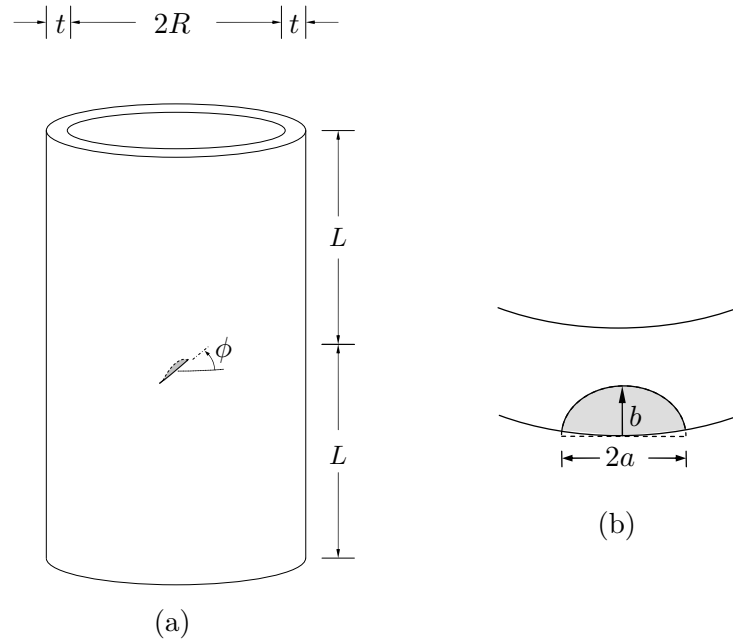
(a) Schematic of a pipe containing a surface breaking flaw. (b) Geometry of the surface breaking flaw.
